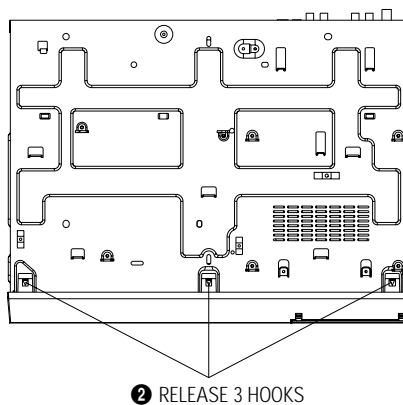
Ass'y Front Panel Removal(Bottom View)
